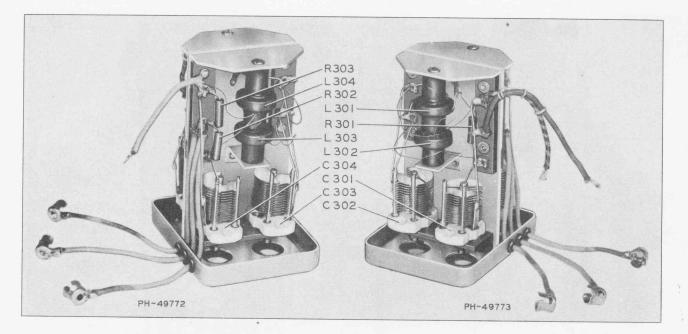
Typical Circuit Assembly (First Stage, 450 KC Section, Front and Rear Views)
